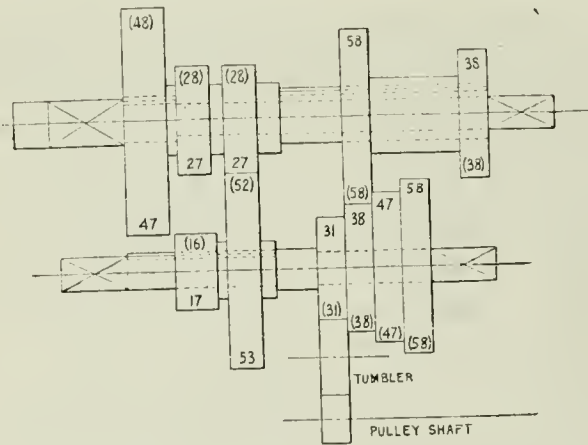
DIAGRAM OF DRIVING GEAR OF A WELL-KNOWN MAKE OF MILLING MACHINE.
